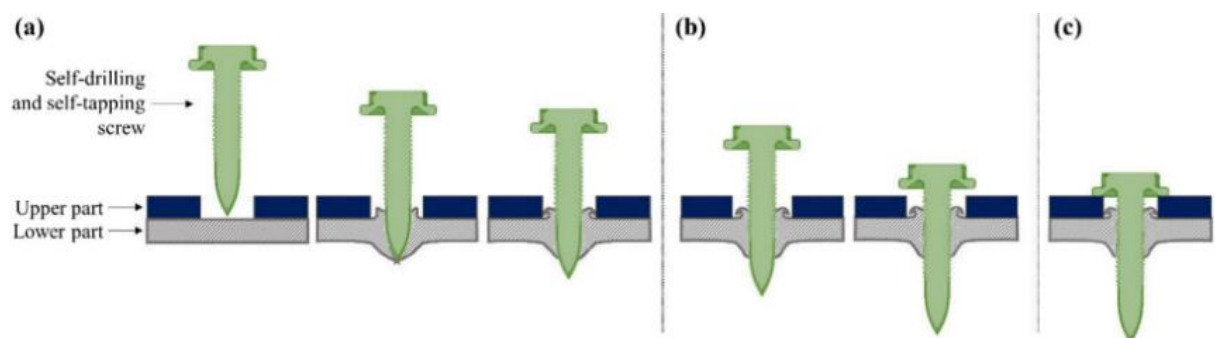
Illustration of the process stages in flow drill screw driving: (a) heating, penetration, and bush forming; (b) thread forming and screw advancing; (c) tightening [11].
